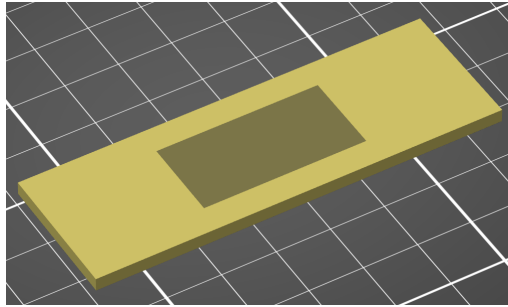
A close-up picture of the design for the 2.5 mm deep mold in PrusaSlicer. The dark rectangle in the middle of the structure is a hole that runs through the whole 2.5 mm mold.
